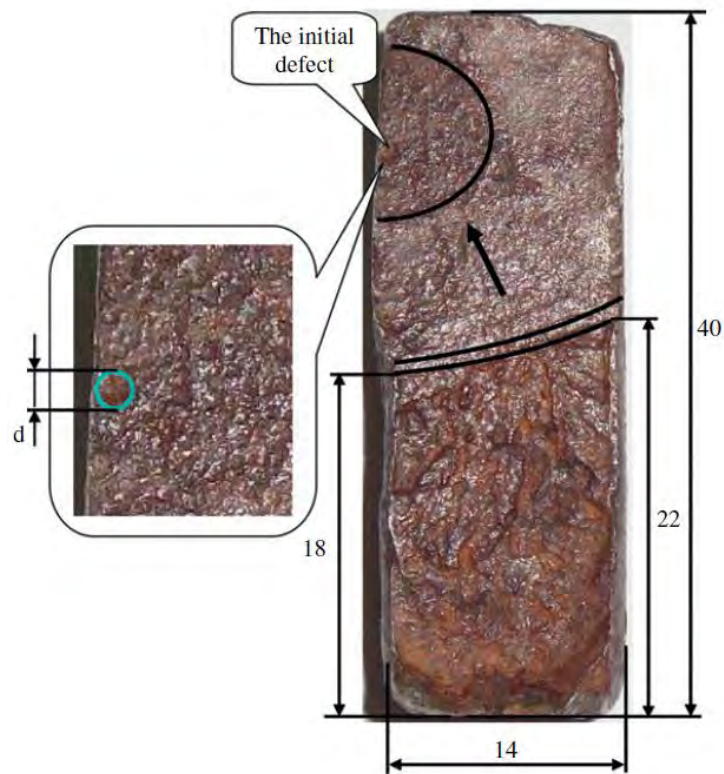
The initial defect location and the size of fracture section (d – the defect diameter in the plane of fracture section).
